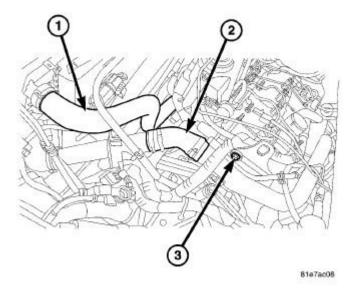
Charge Air Cooler Hoses Courtesy of CHRYSLER LLC
